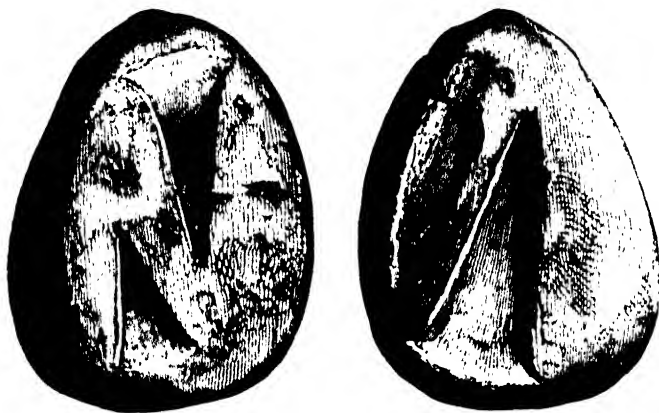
UNIVALVE STONE MOLDS FOR CASTING THREE AXES AND A KNIFE.
